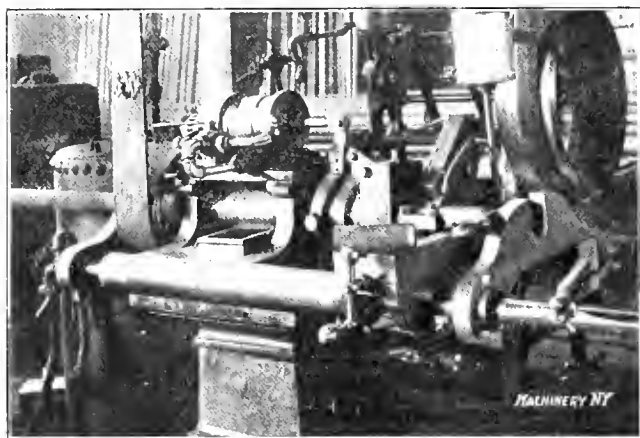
Machine for Cutting and Beveling Flue Repair Ends
